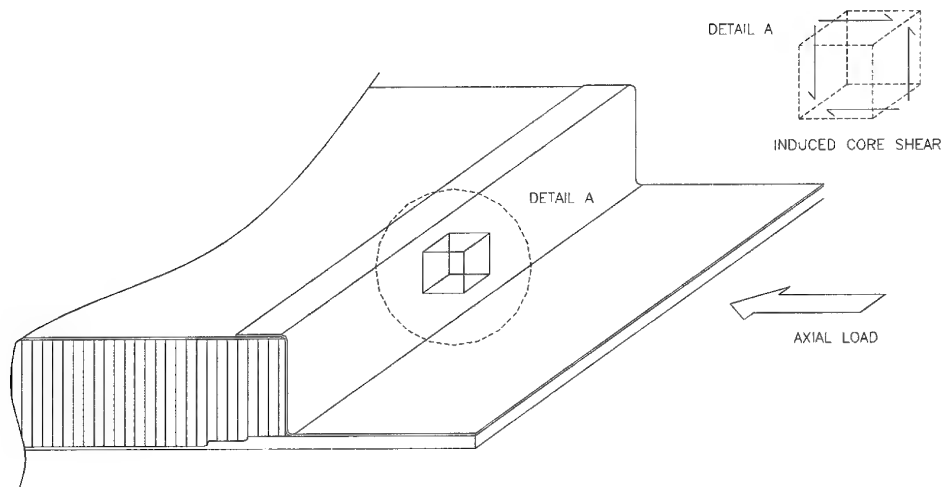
Fuselage bending leads to axial compression or tension in the face that induces shear in the core.
